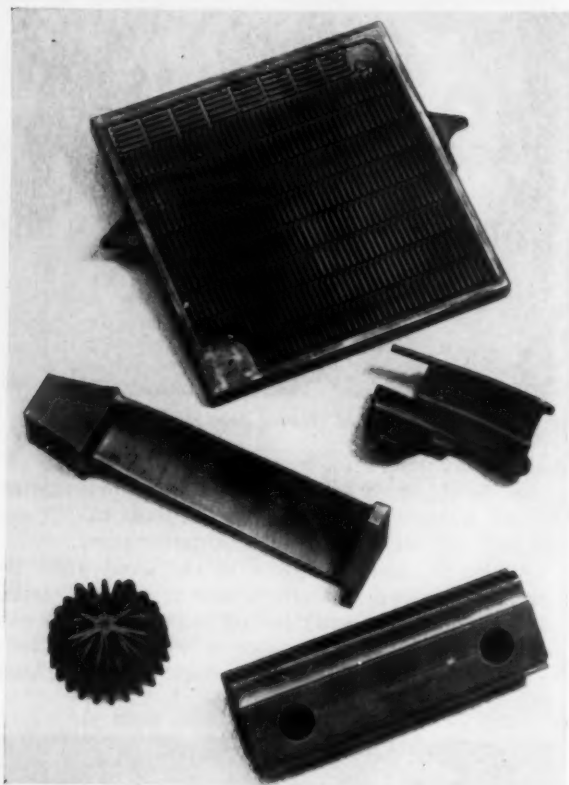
Steel castings weighing 6 oz-5½ lb. At top, 18-8 filter press part. Middle left, turbine blade; middle right, carbon steel forming tool. Bottom left, heat resistant diesel engine head; bottom right, 10%-W steel breech.
